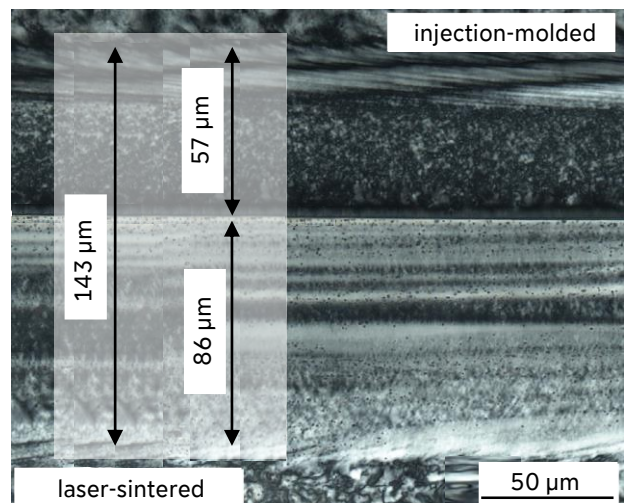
Morphological weld seam structure of infrared-welded joint between laser-sintered and injection-molded part
